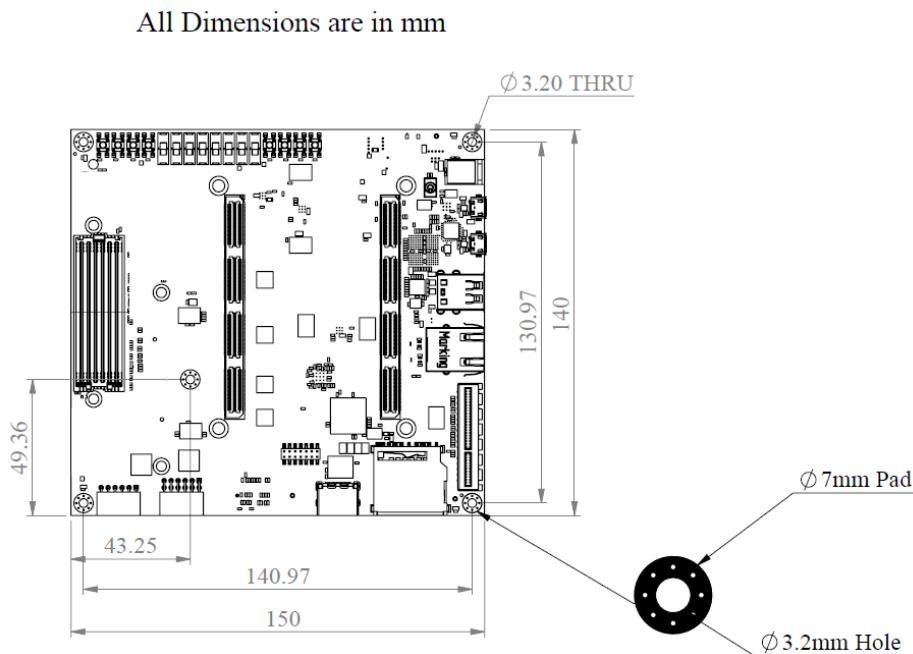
Arria10 SoC/FPGA custom carrier board – Top View
